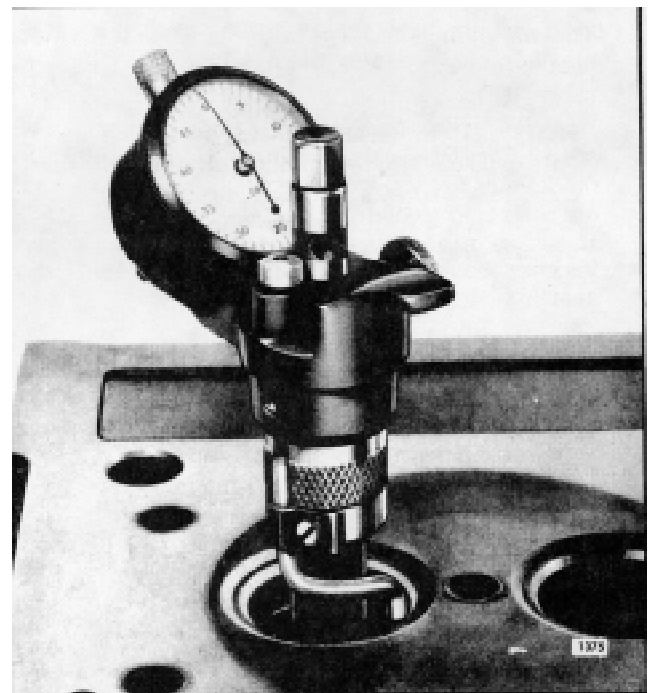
Determining Concentricity of Valve Seat Insert with Dial Indicator J 81
